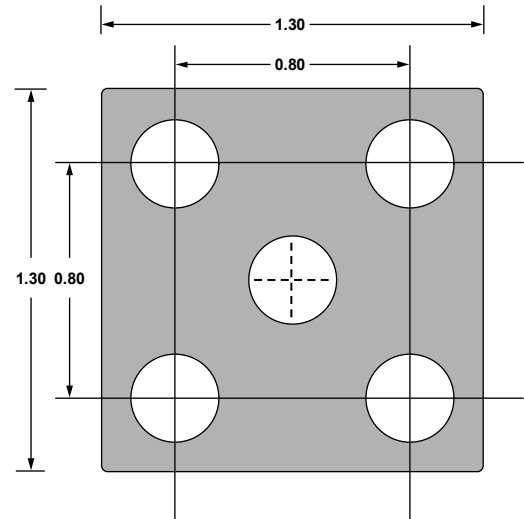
Recommended PCB Thermal Attach Pad (Dimensions in Millimeters)
